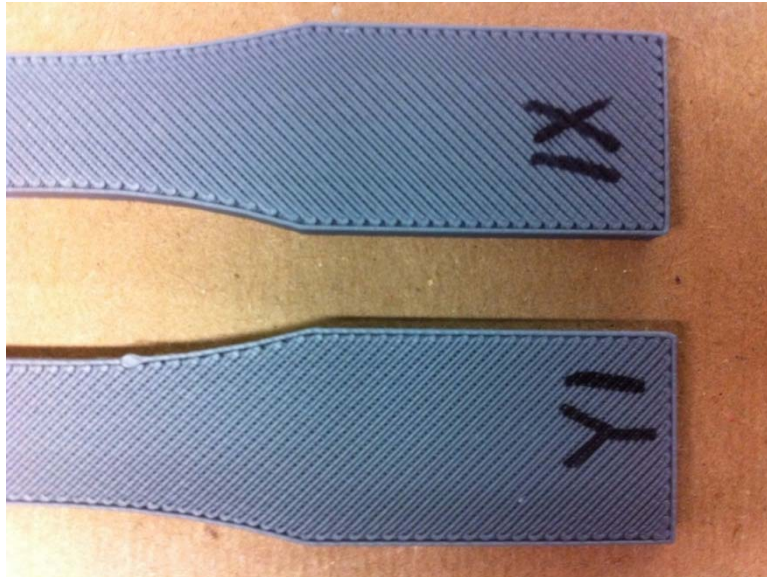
By using Dimension 3D Printer, TEES built ASTM D0638 specimens. It shows obvious fiber directions because the ABS material is not completely fused.
